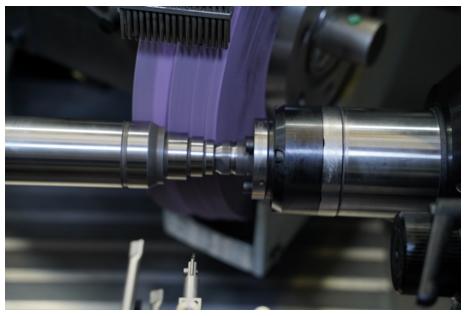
Grinding in single clamping. (Source: BUDERUS Schleiftechnik)
